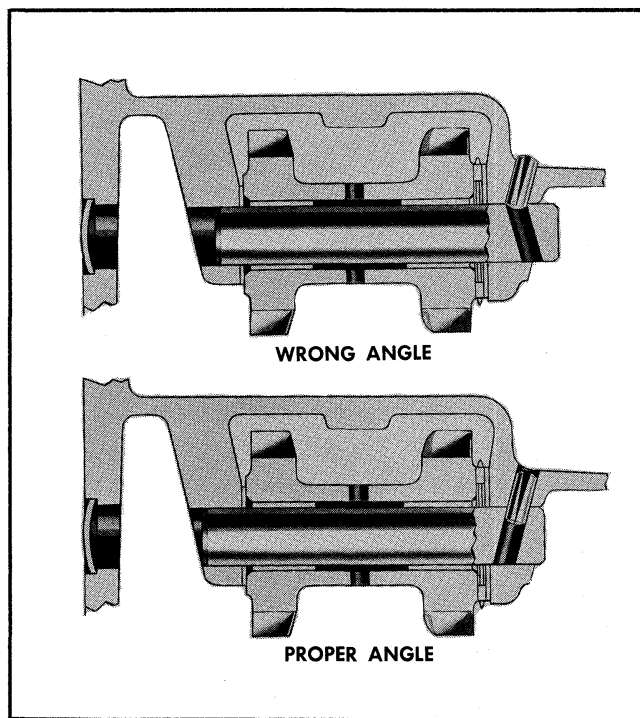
Reverse Idler Gear Shaft and Lock Pin
